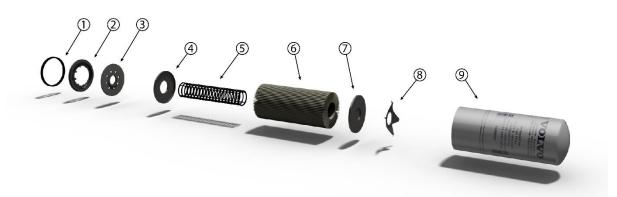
Exploded view, reference filter: (1) Gasket (2) Retainer sheet (3) Interface plate (4) Filter element cap (5) Inner tube (6). Filter element (7) Filter element cap (8) Bypass spring (9) Canister
